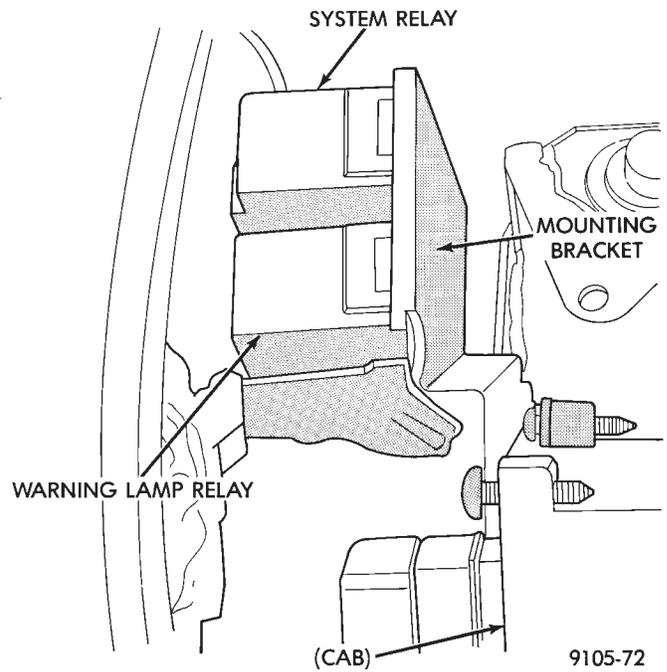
System Relay/Warning Lamp Relay Location REMOVE
